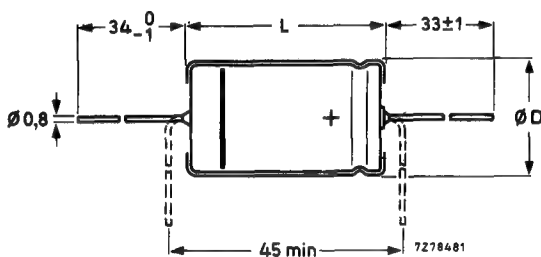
Style 1; see Table 1a for dimensions D and L.
